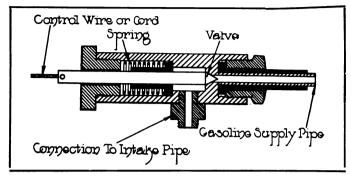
Valve Device for Priming Intake Manifold with Gasoline to Secure Preliminary Explosions When a Heavy Fuel Is Employed.
